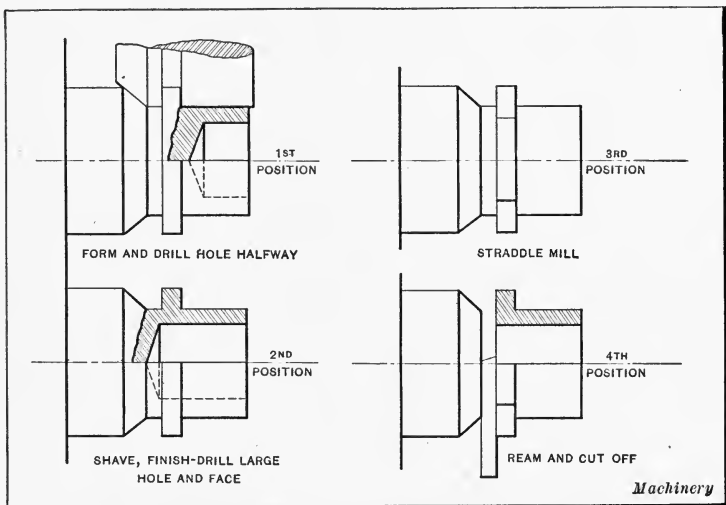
Successive Operations on Steel Bushing shown in Fig. 31
